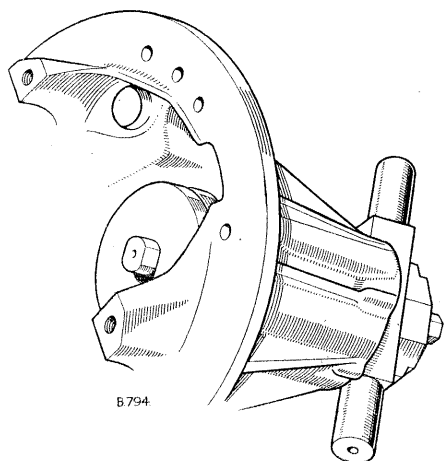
Pressing pinion end bearing outer member into pinion casing
